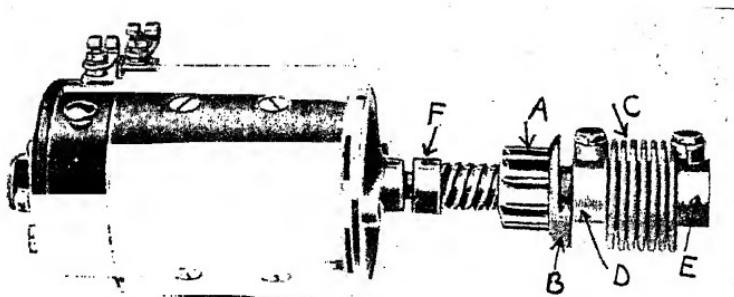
M.C.L. STARTER WITH BENDIX DRIVE
